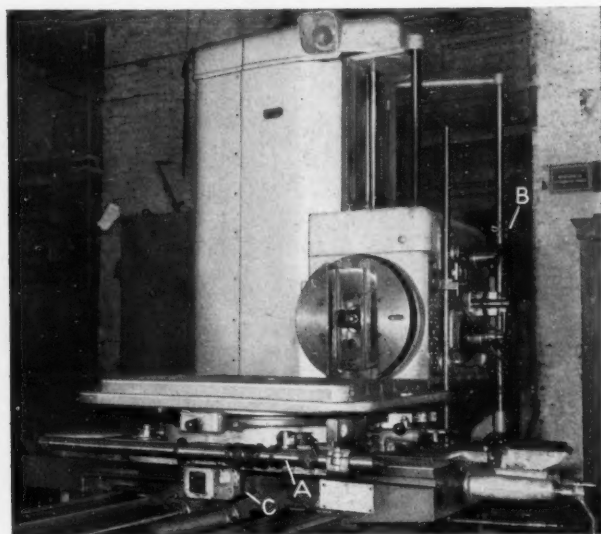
The Prototype 2620A Horizontal Boring Machine, Here Shown, has been Fitted with an Electro-mechanical Positional Control System for the Table and Headstock
